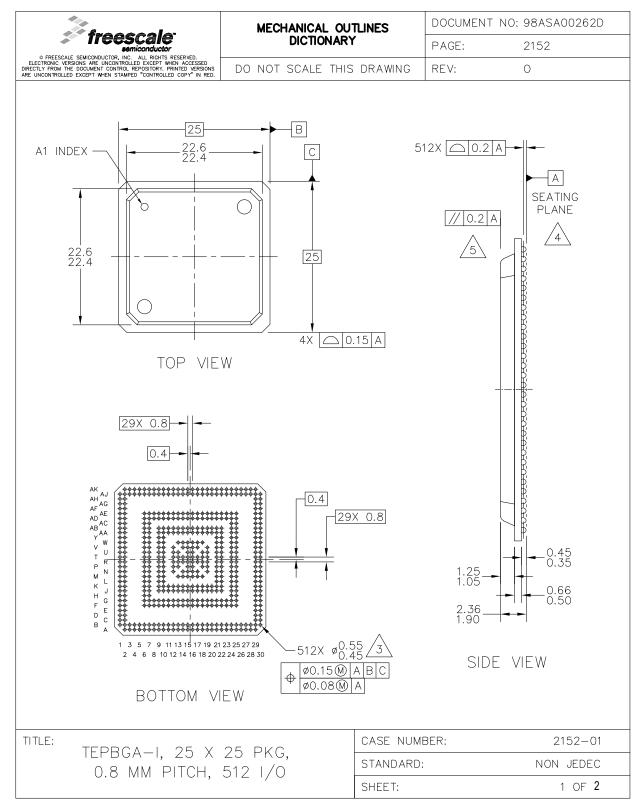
512 TEPBGA package mechanical drawing (Sheet 1 of 2)
